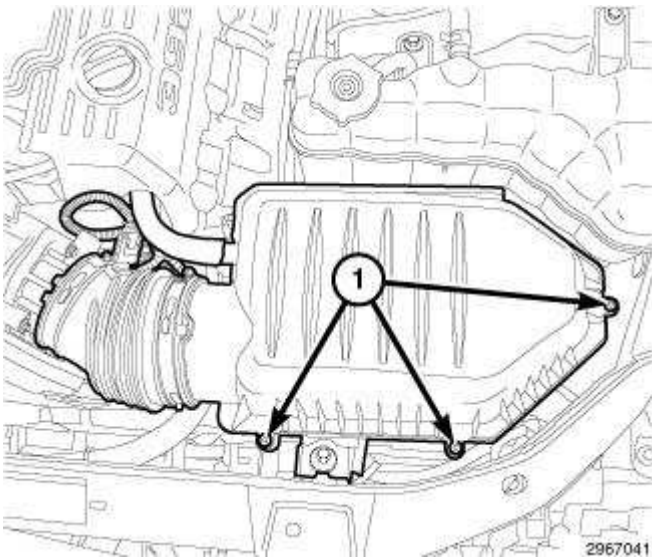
Air Cleaner Housing Cover Retaining Screws
